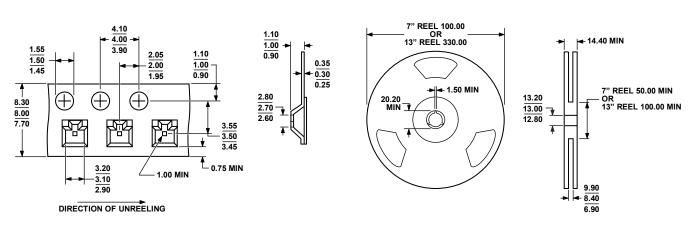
Tape and Reel Dimensions (RT-3) Dimensions shown in millimeters
